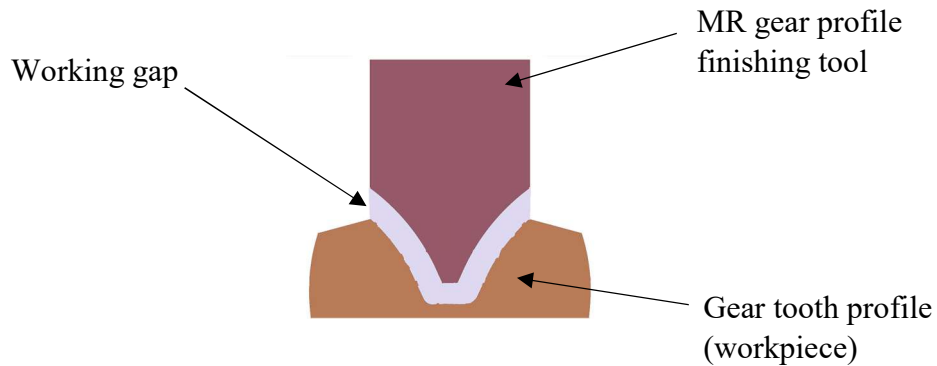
Schematic of working gap between tool surface and workpiece surface.
